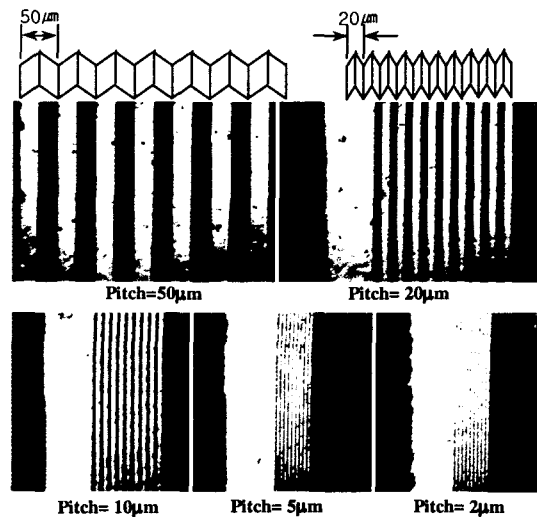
Machining surface of workpiece(depth 5 μ m)
